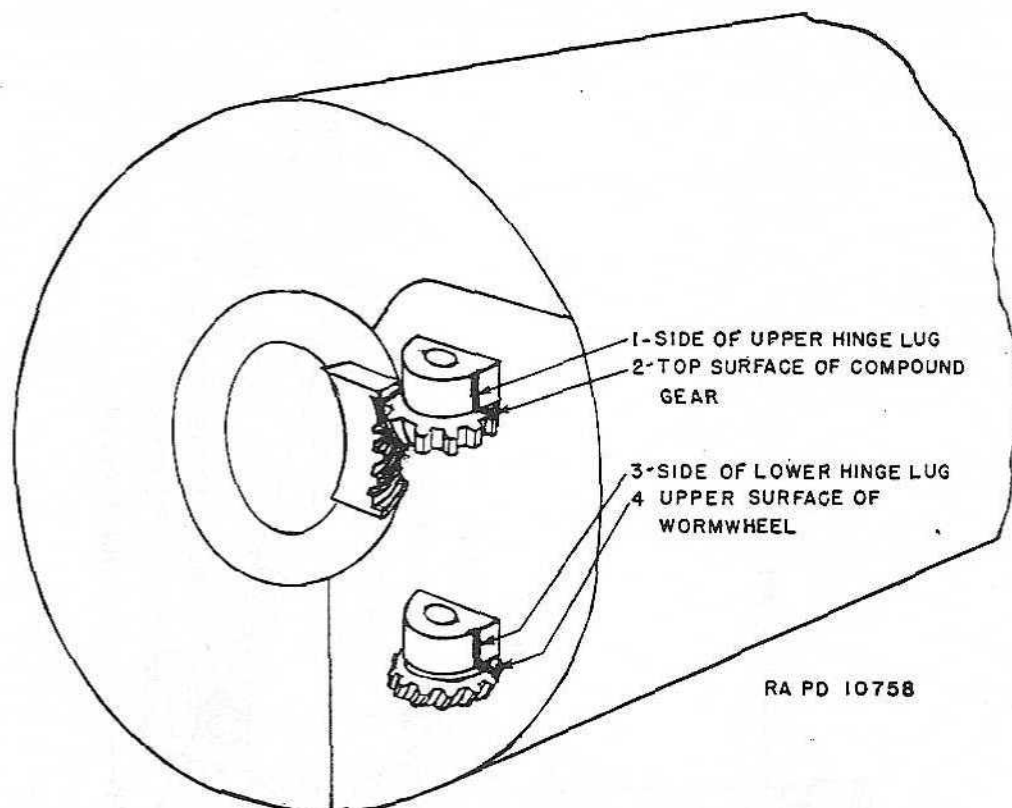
Marking lines for disassembly and assembly of breech mechanism.
